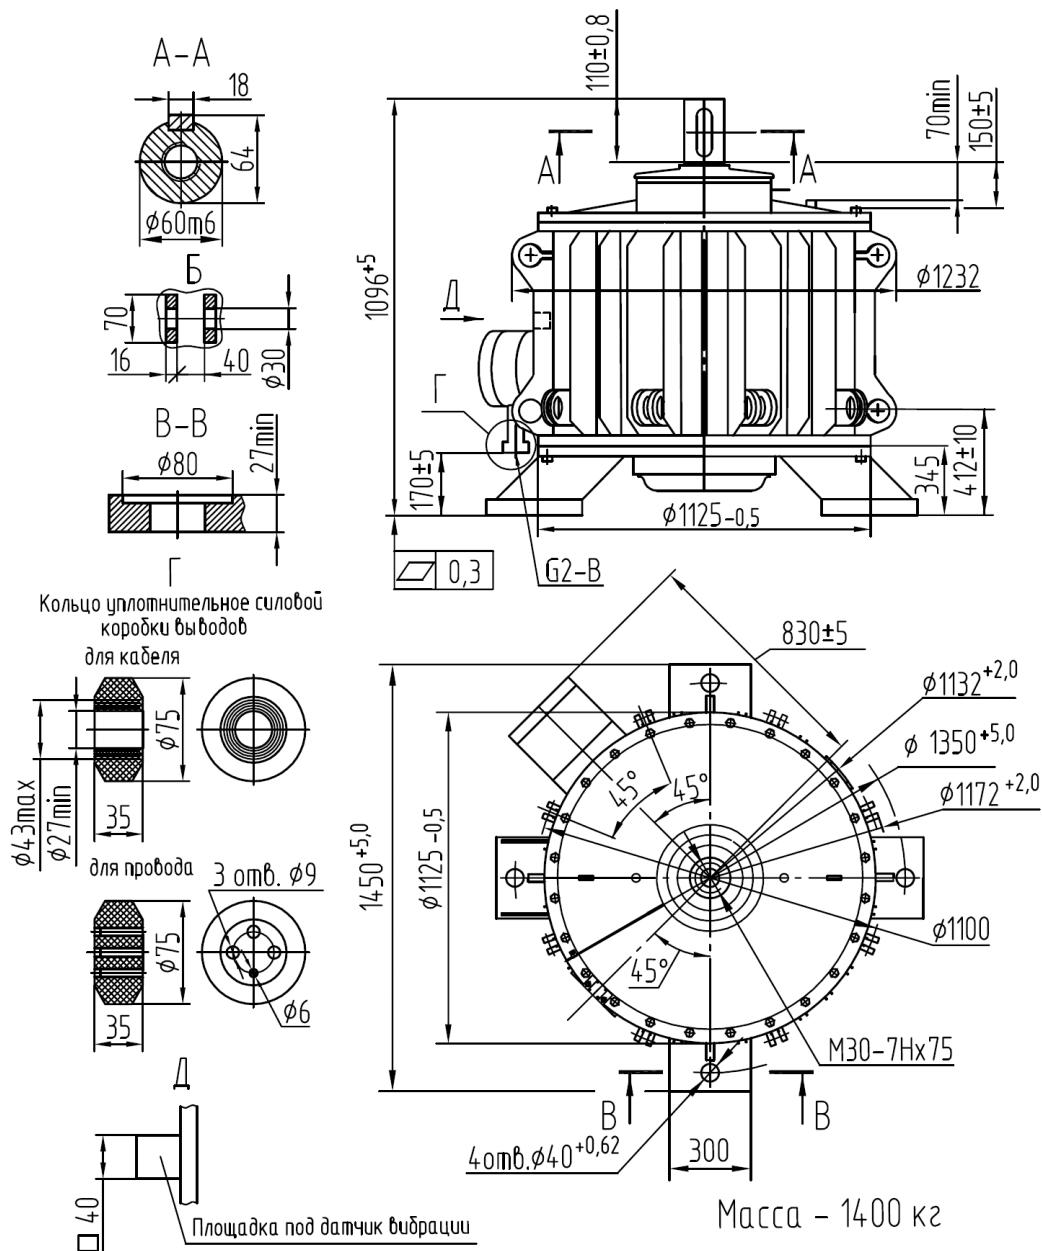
Overall and mounting dimensions and weight of the BACO5K-37-24 motor with cylindrical shaft end
